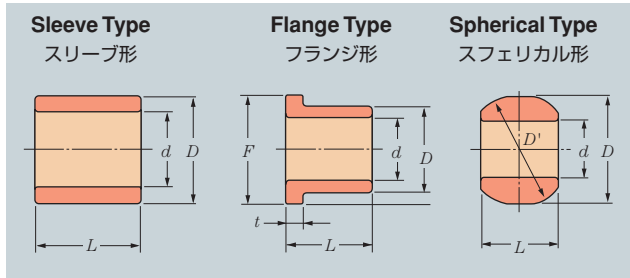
Tolerances of generic oil-impregnated bearings
